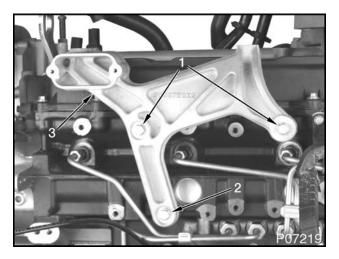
High Pressure Charge Air Cooler (HPCAC) bracket
